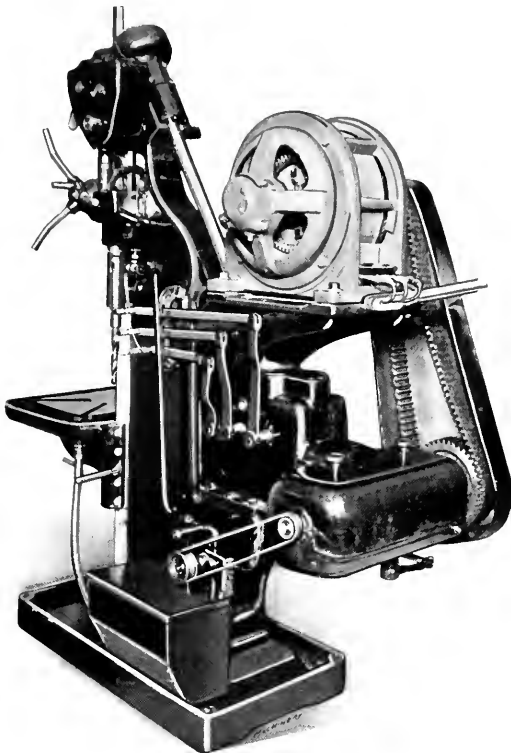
Barnes 22-inch Drill equipped with Morse Silent Chain Drive
